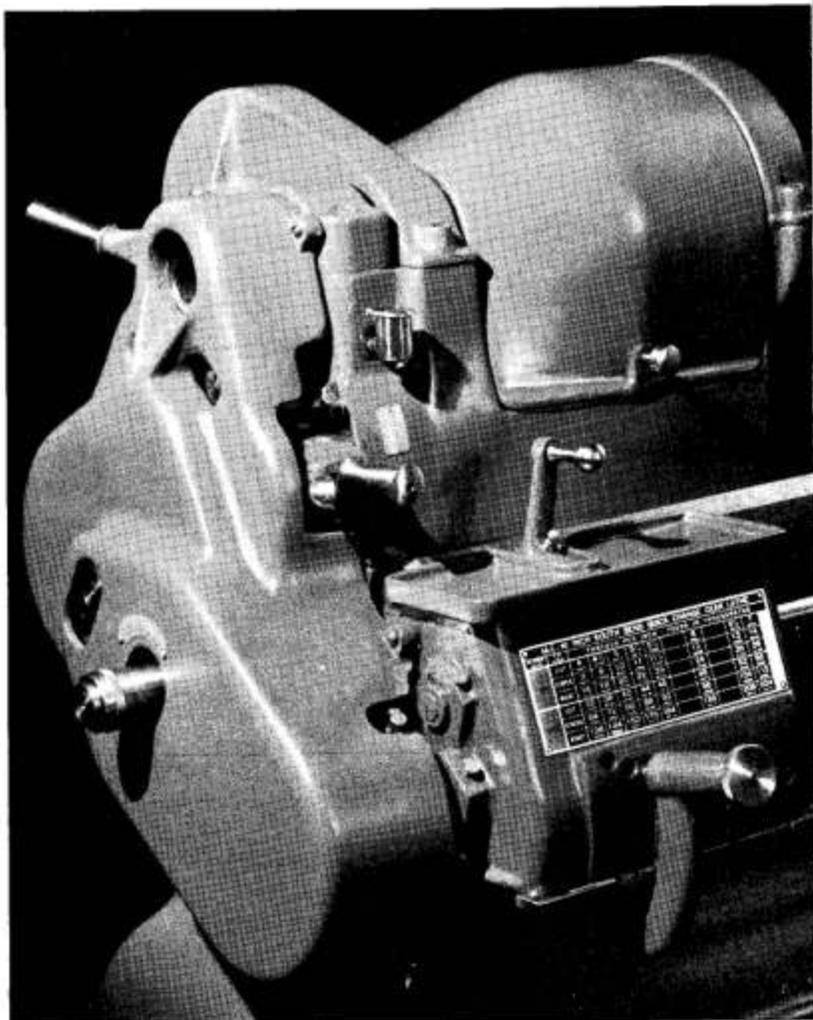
Quick Change Gear Mechanism for 10-inch and Larger South Bend Lathes
